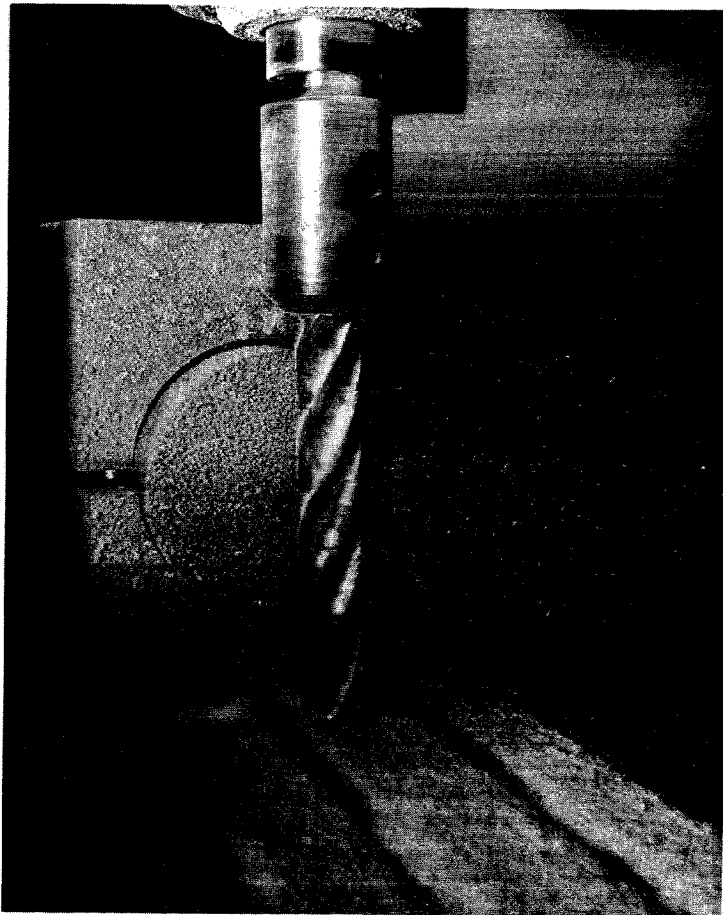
Milling machine trimming ends of rough-cut ice cylinders.
